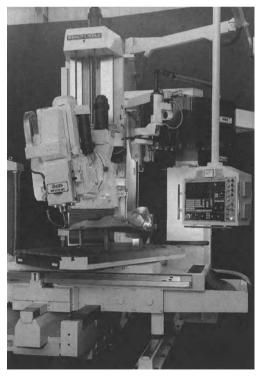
A 6-axis machining centre cutting a complex curved component. [Courtesy of Bohner & Kohle.]
